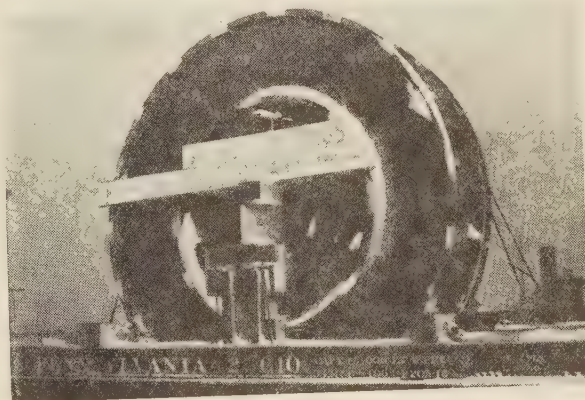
RUNNER CASTING FOR 150,000-HP TURBINE
